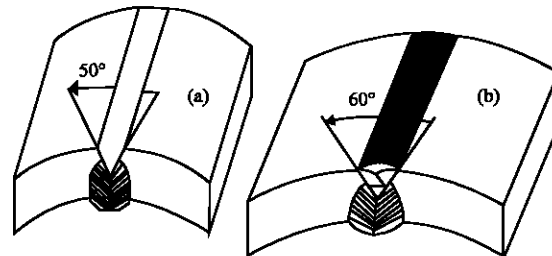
(a) Preparation and (b) welding pass sequence of repaired transverse weld joint
